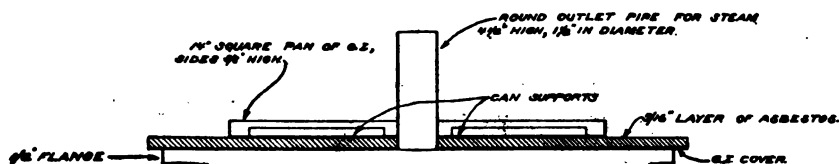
SECTION THROUGH COVER OF ROASTING PAN.
